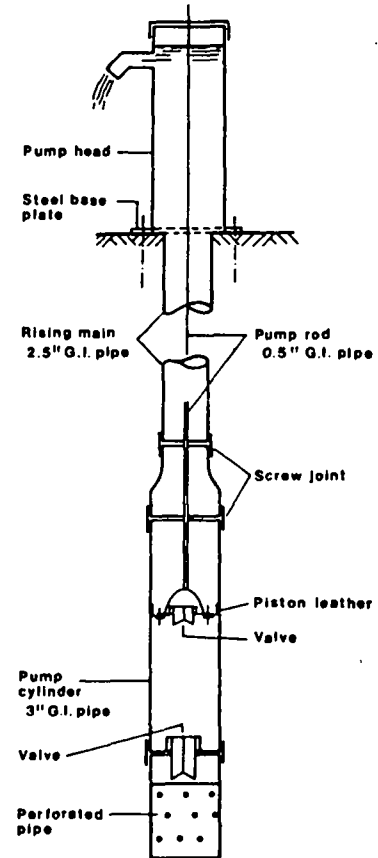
Handpump made of galvanised iron pipe (Zambia)
